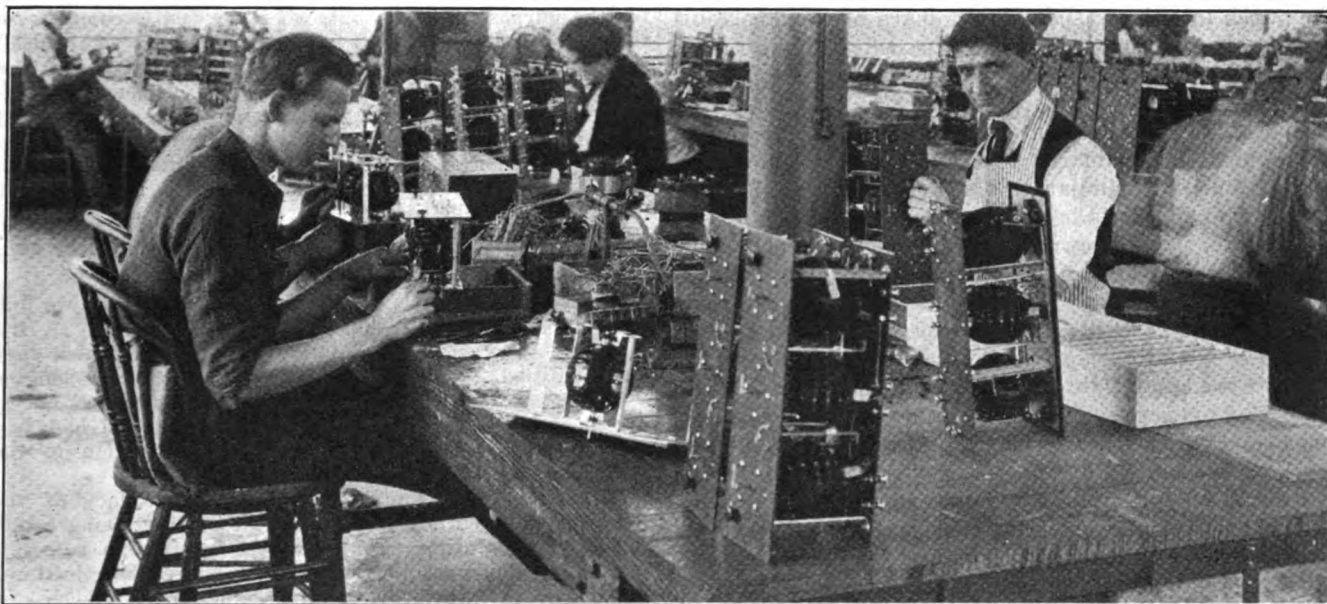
ASSEMBLING OPERATIONS ON THE COMPLETE UNITS
